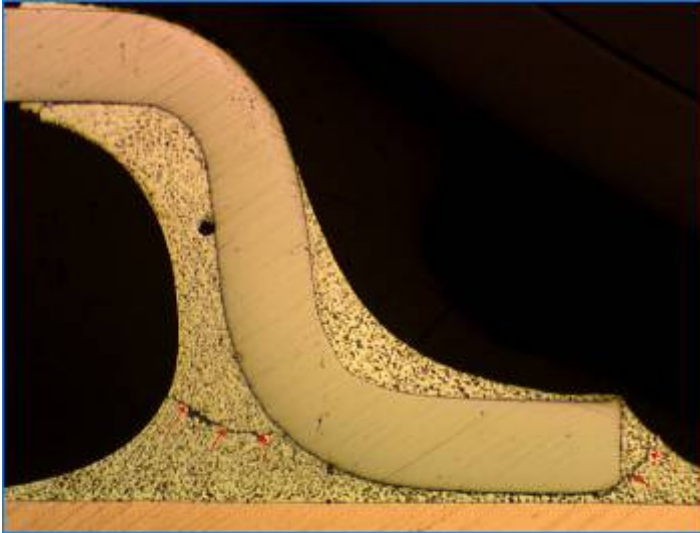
cross section, SN61, U62, right lead, solder crack, 100x
